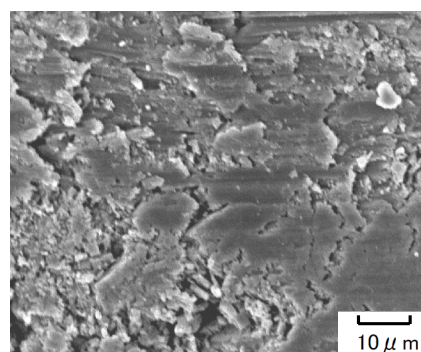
Enlarged view of machined surface of composite A ($V_f = 45$ vol% , $v = 50$ m/min, $f = 0.2$ mm/rev).
